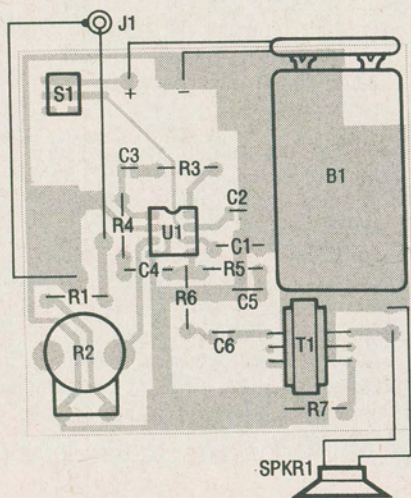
Solder the components to the board using this parts-placement diagram as a guide.
